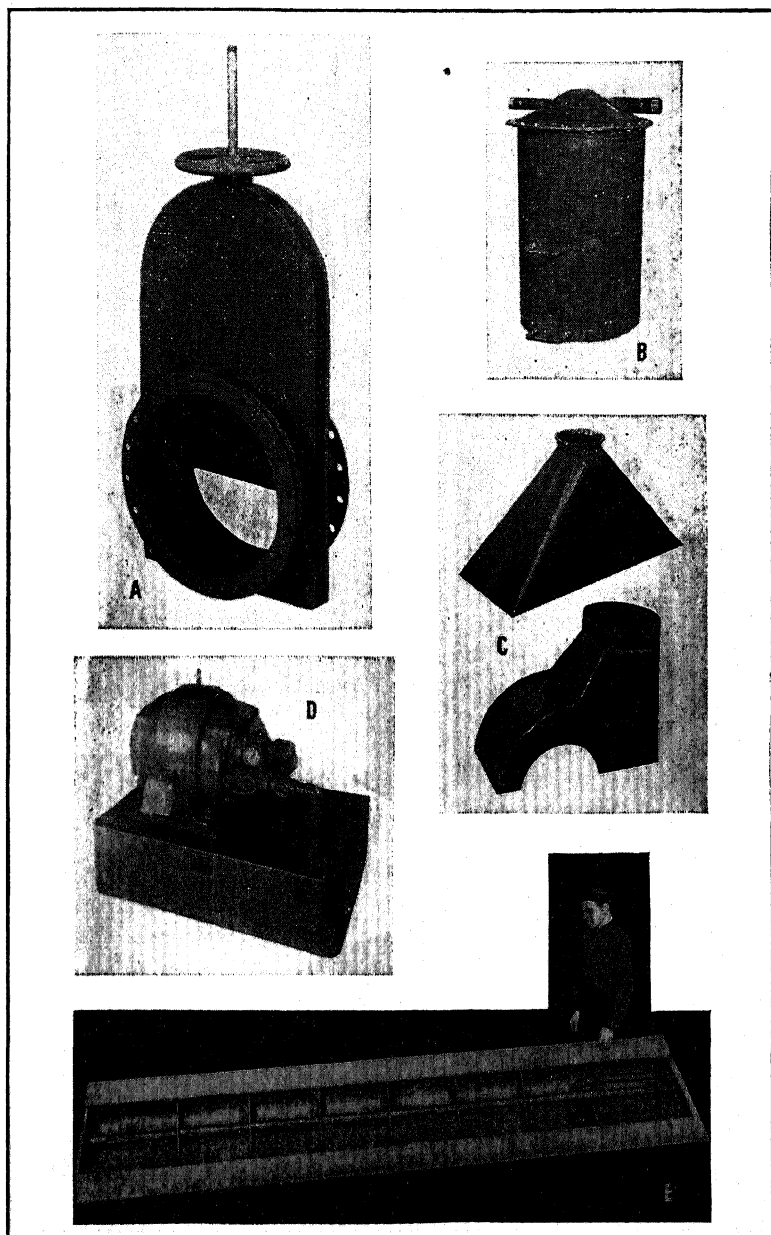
CONTAINERS—(A) 30-inch blast gate for gas producer. (B) Vacuum pan condenser. (C) Fan dischargers for grain mill. (D) Combination base and oil reservoir. (E) 1,300-lb. Diesel engine oil pan.
